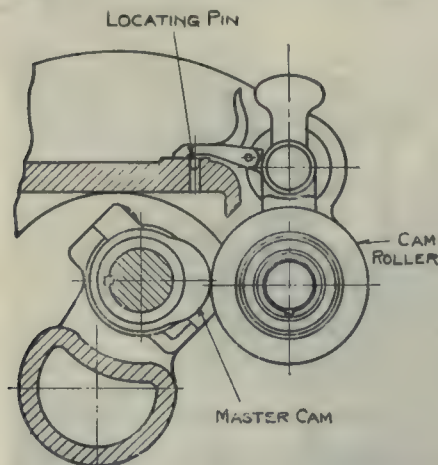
SHOWING MASTER CAM, LOCATING PIN, AND CAM ROLLER.
